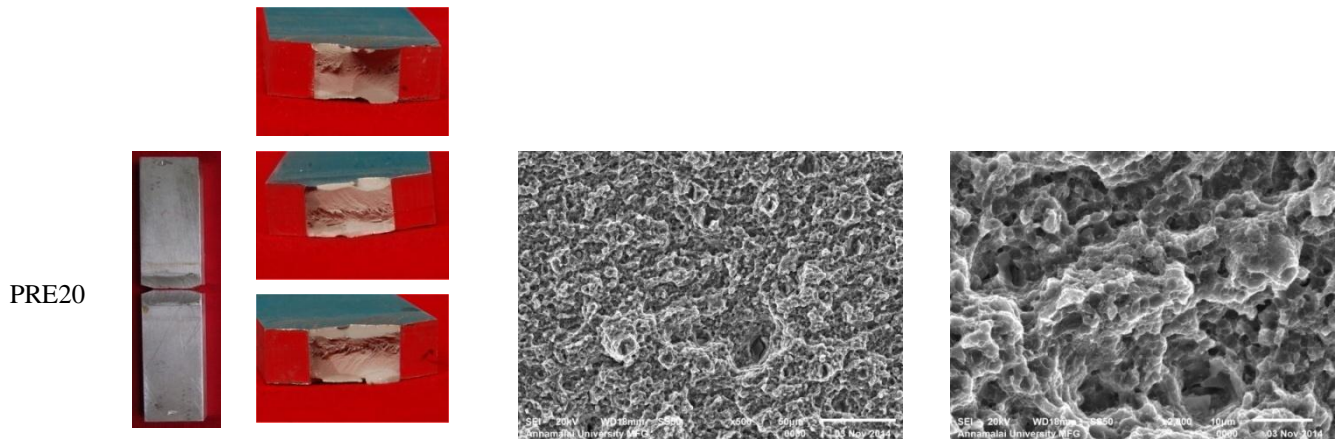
Fracture location and corresponding Fracture location microstructures of notched tensile specimens
